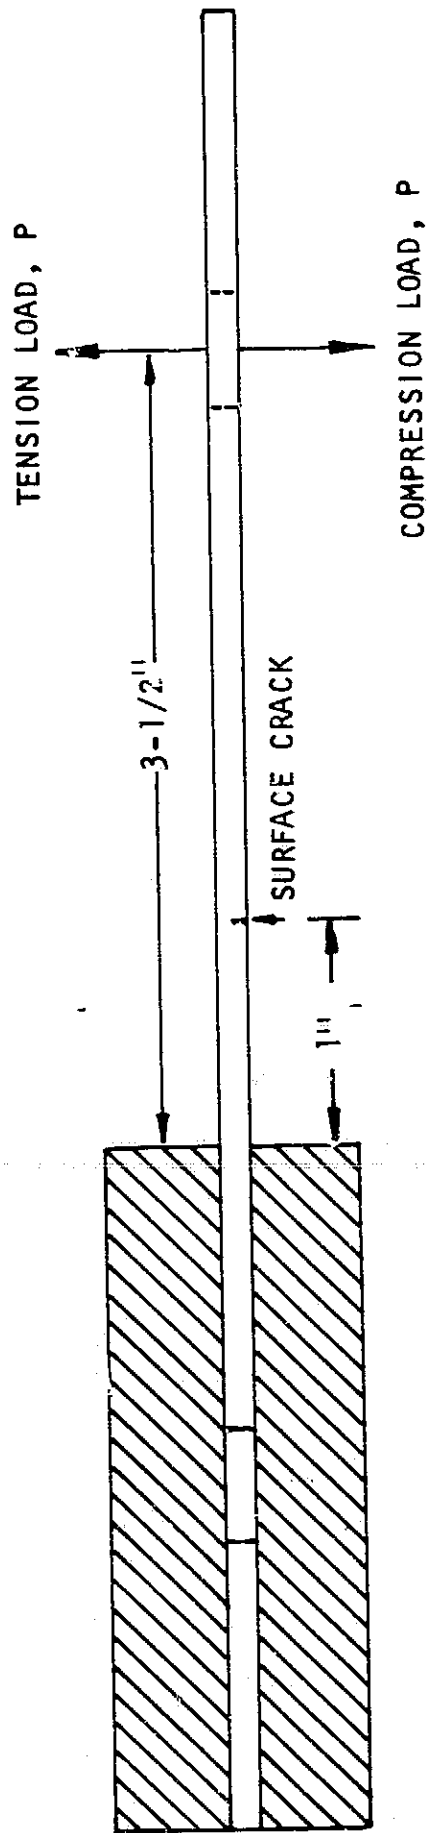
Cantilever beam arrangement for placing horizontal stresses on fatigue cracks.
